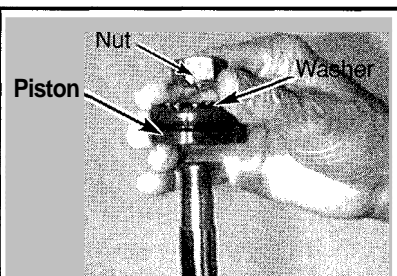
Remove the nut and washer from the end of the rod and slide the piston off the rod
